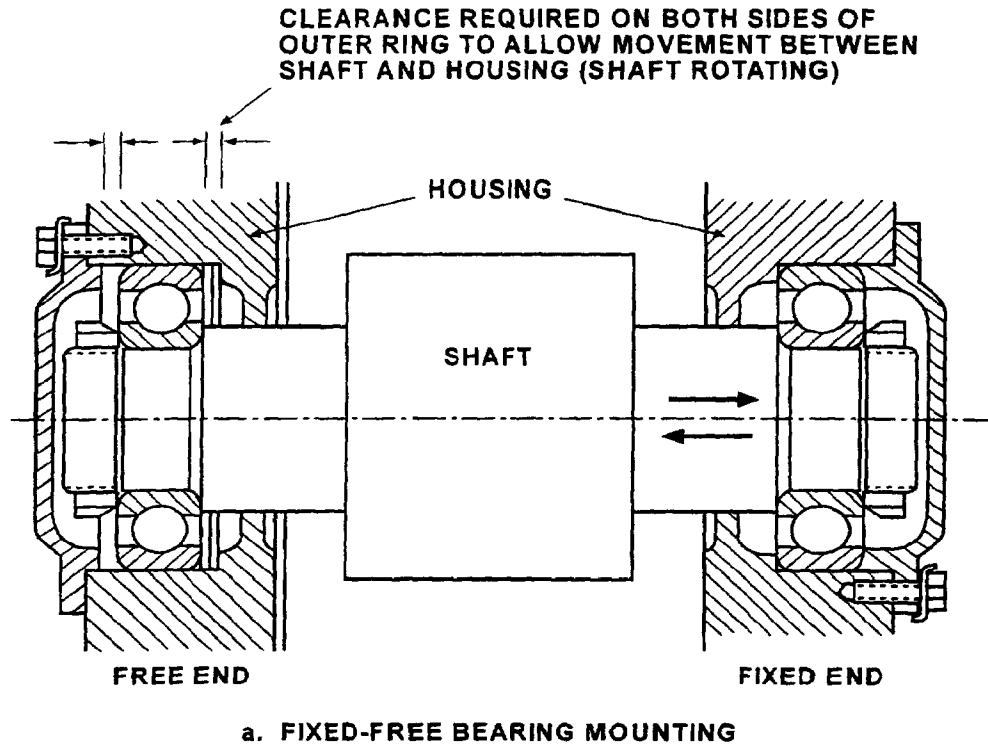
Mounting Methods for Horizontally Mounted Ball Bearings
